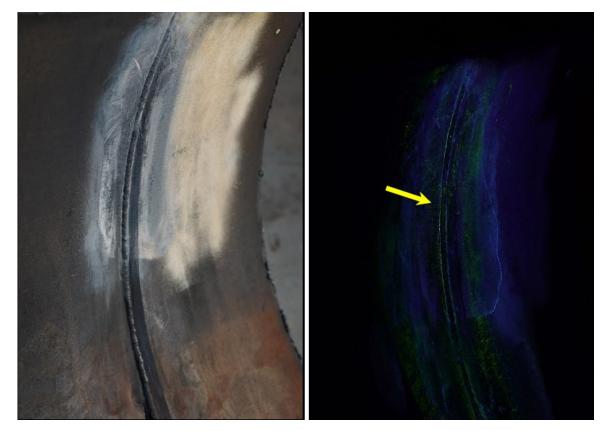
GWD 13520 Internal Girth Weld Showing LOF Defects in the Root Pass, Photo from AA.
